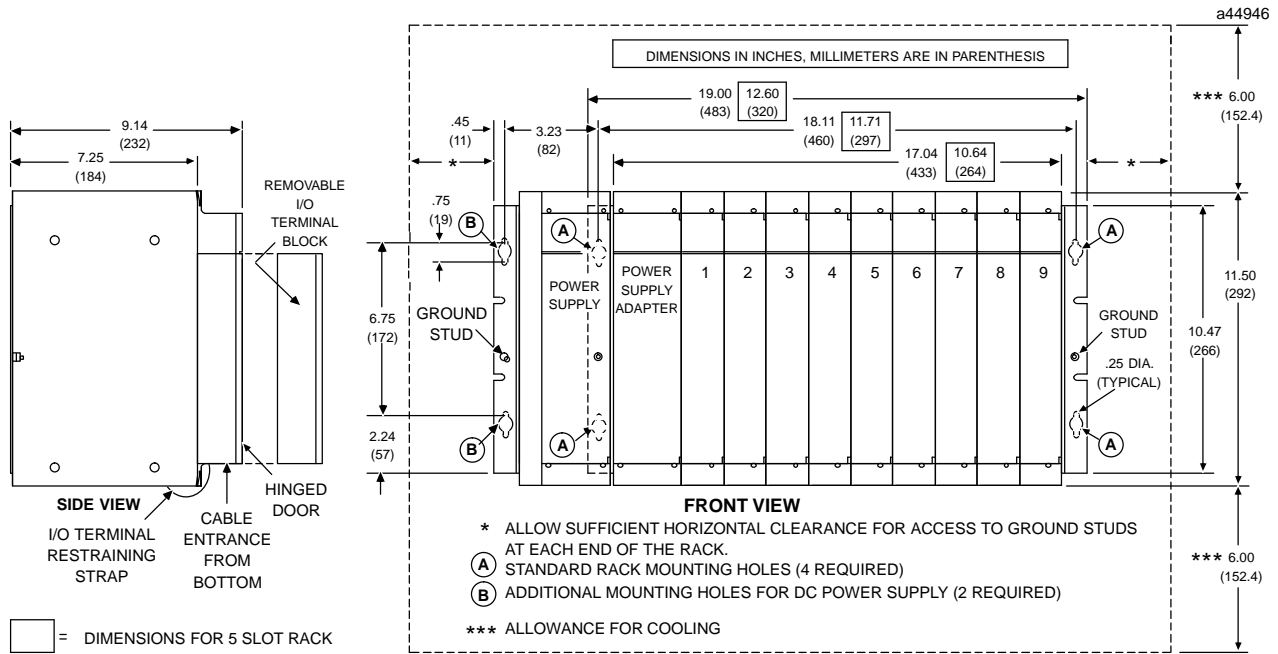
Rack Mounting Dimensions with Power Supply Attached
